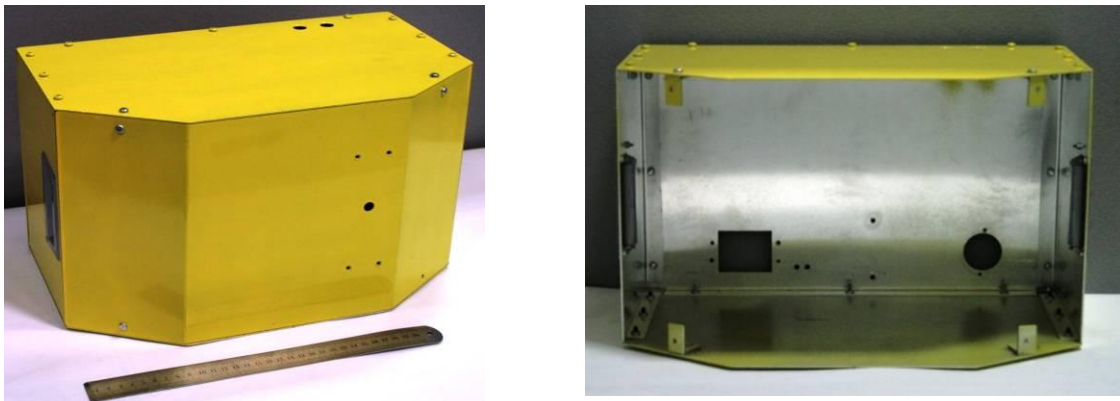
Front side of the Module Box (left); Empty space inside (right).
